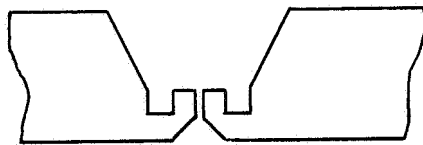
JOINT WITH FORMED ROOT USED IN WELDING STAINLESS STEEL PIPE (REF. 10)
